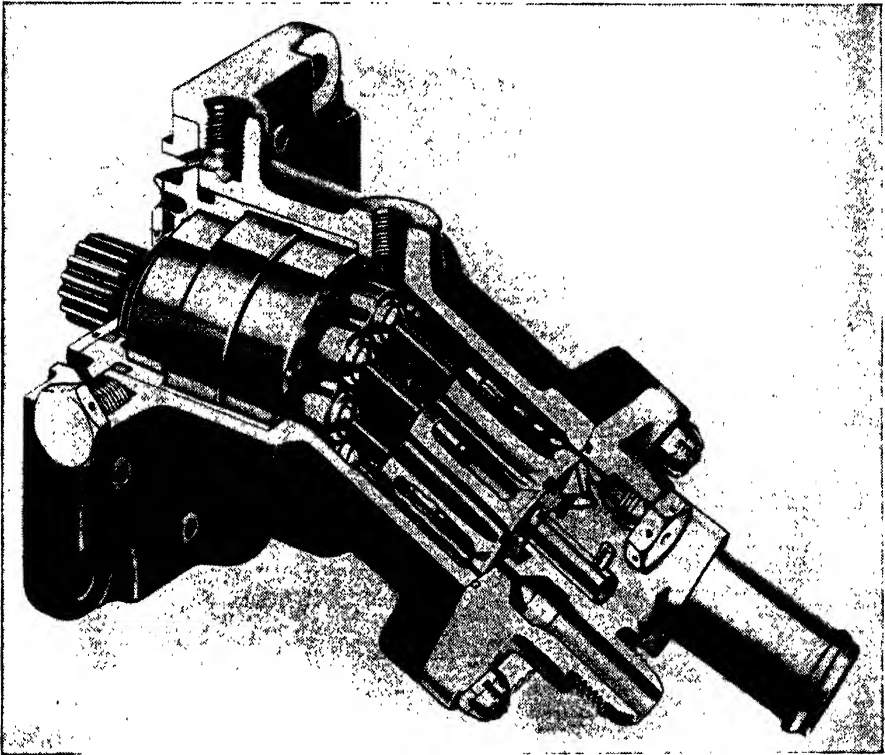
Axial-piston fixed-stroke pump. (*Courtesy of Vickers Incorporated.*)
